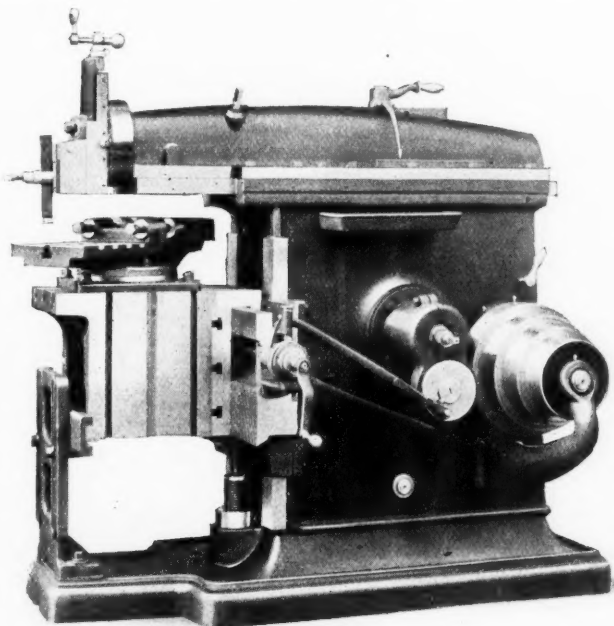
Queen City 16-inch Back-geared Crank Shaper
